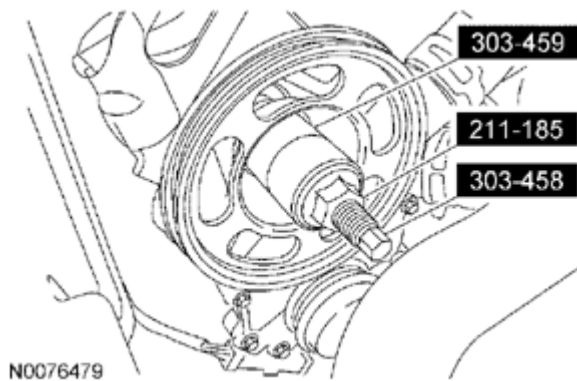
Installing Special Tools Flush With End Of Camshaft
